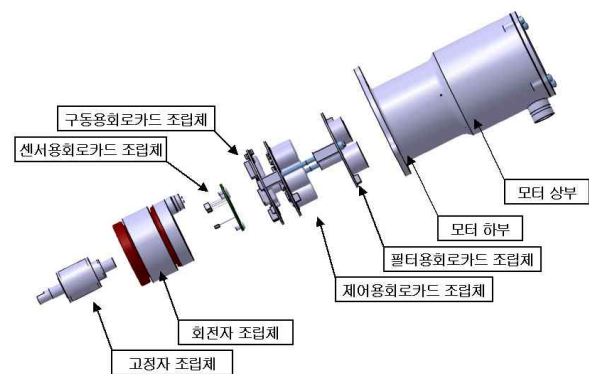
Layout of Motor Assembly for Fuel Boost Pump
